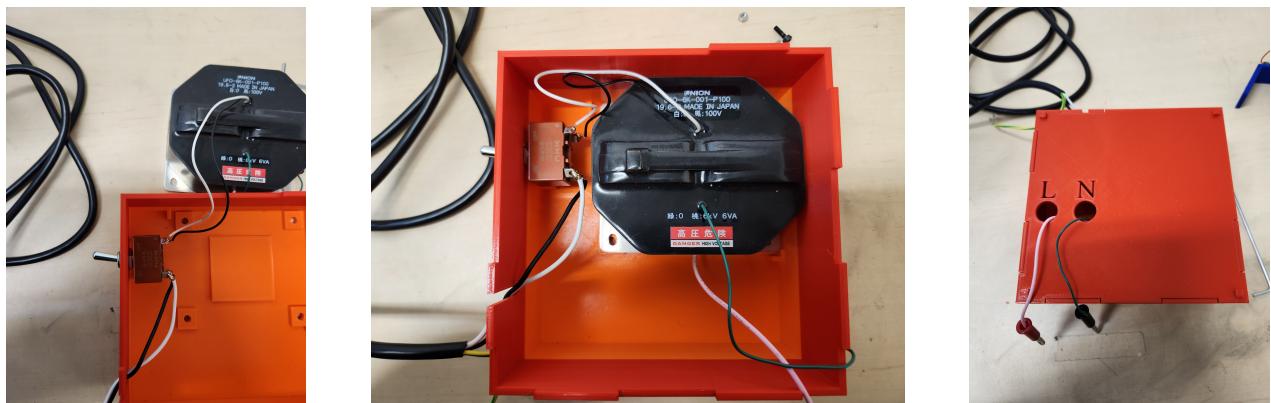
(left) attach the toggle switch to the power_supply_module_box.stl, (center) insert the transformer (right) assembled product
